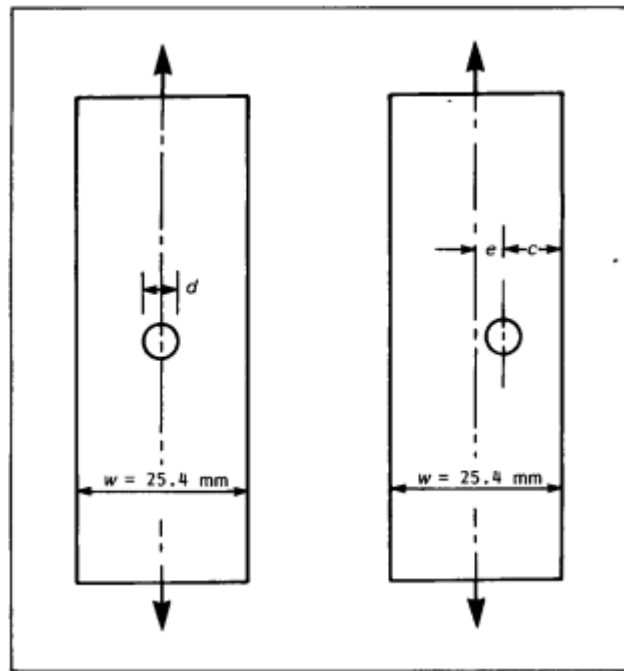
Specimen configuration with (left) centered hole, and (right) off-centered hole
